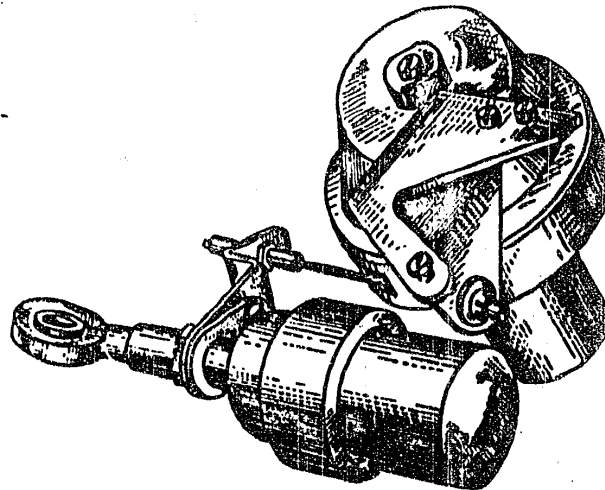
FEEDBACK AND INDICATION PICK-UP AND SWITCH DRIVE ASSEMBLY
